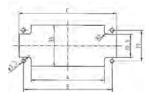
Screw adapter, bulkhead mounted side (bottom part)
